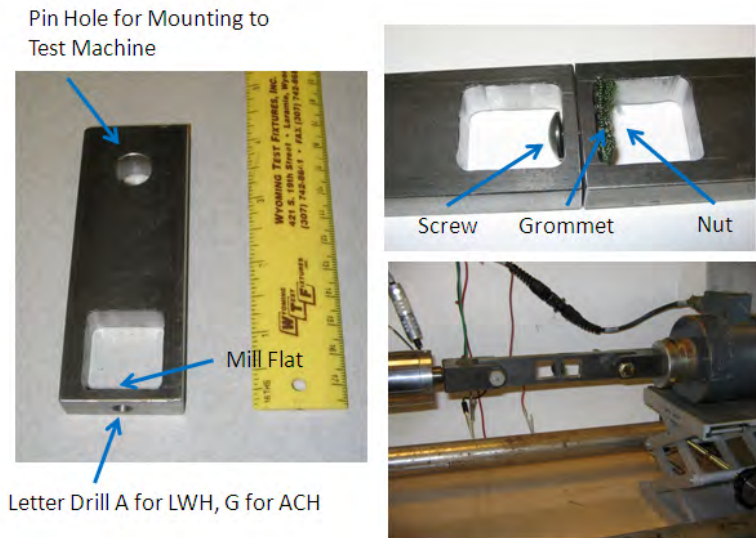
Fixturing used for the thread proof tests and tensile tests. For tensile tests of the screws, the grommet and conic nut is replaced with a machine nut. The lower right image shows the fixture as mounted in a horizontal servohydraulic test machine.
